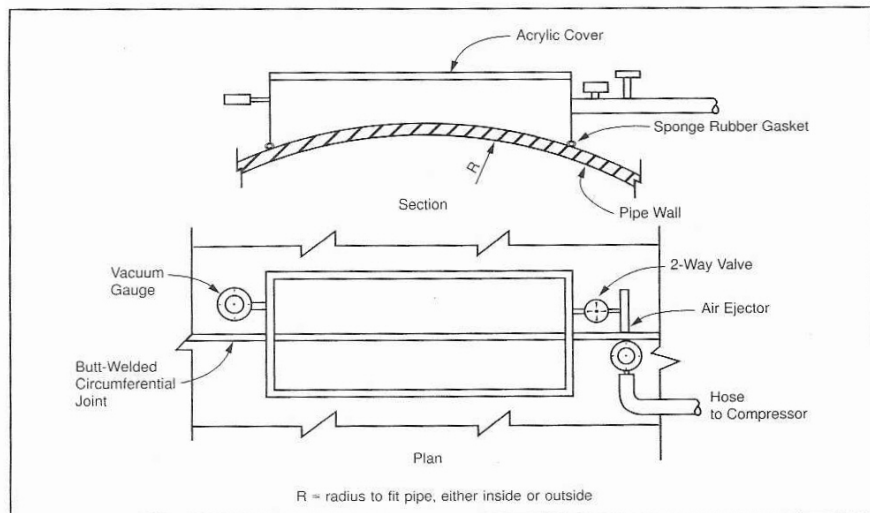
Look-box for vacuum testing of circumferential weld seams
